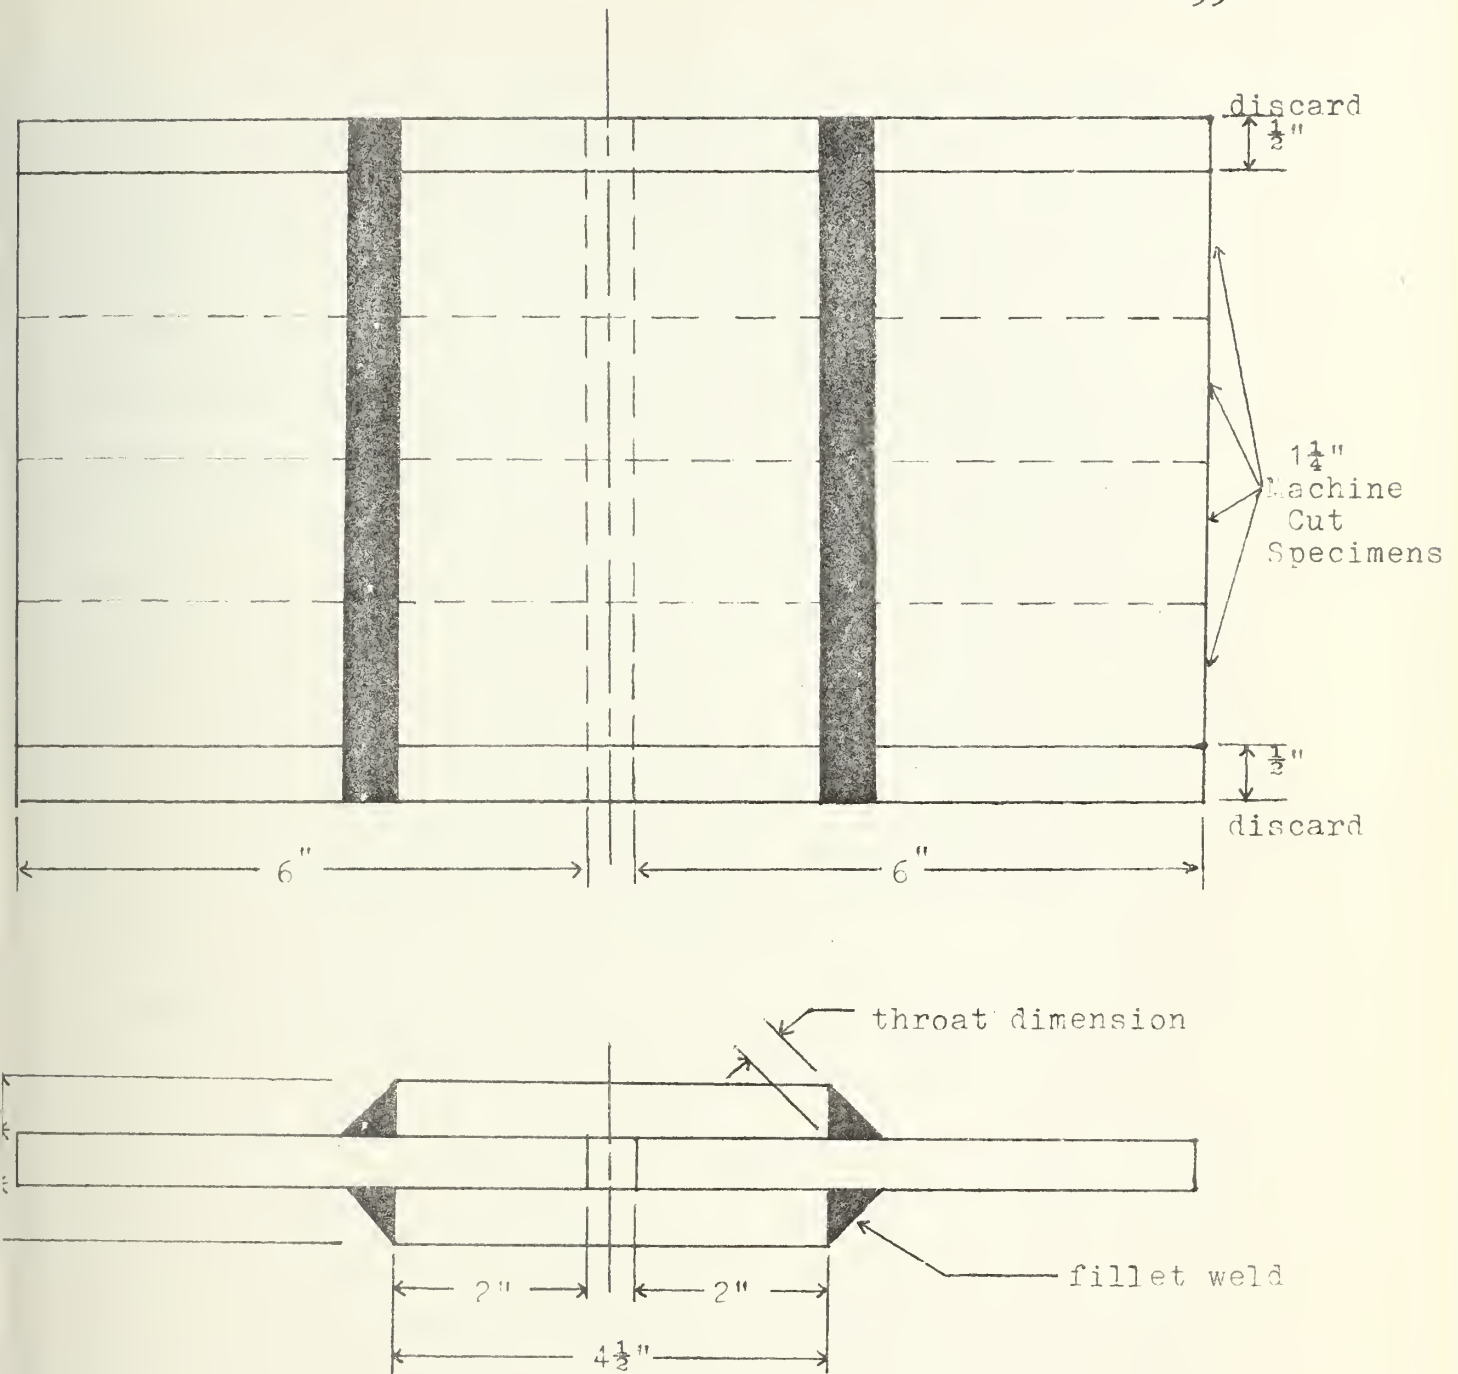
Transverse fillet-weld shear specimen.
